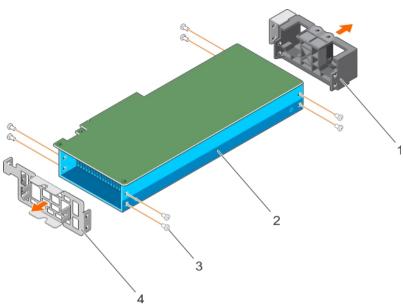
Removing the custom Intel GPU I/O brackets and the support brackets
